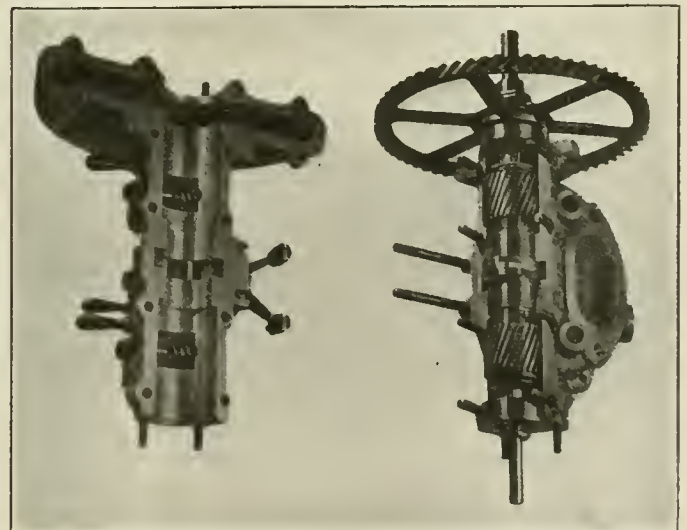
VALVE-GEAR MECHANISM FOR VARYING VALVE LIFT OF THE UNIVERSAL TEST OIL ENGINE SHOWN IN FIG. 13
